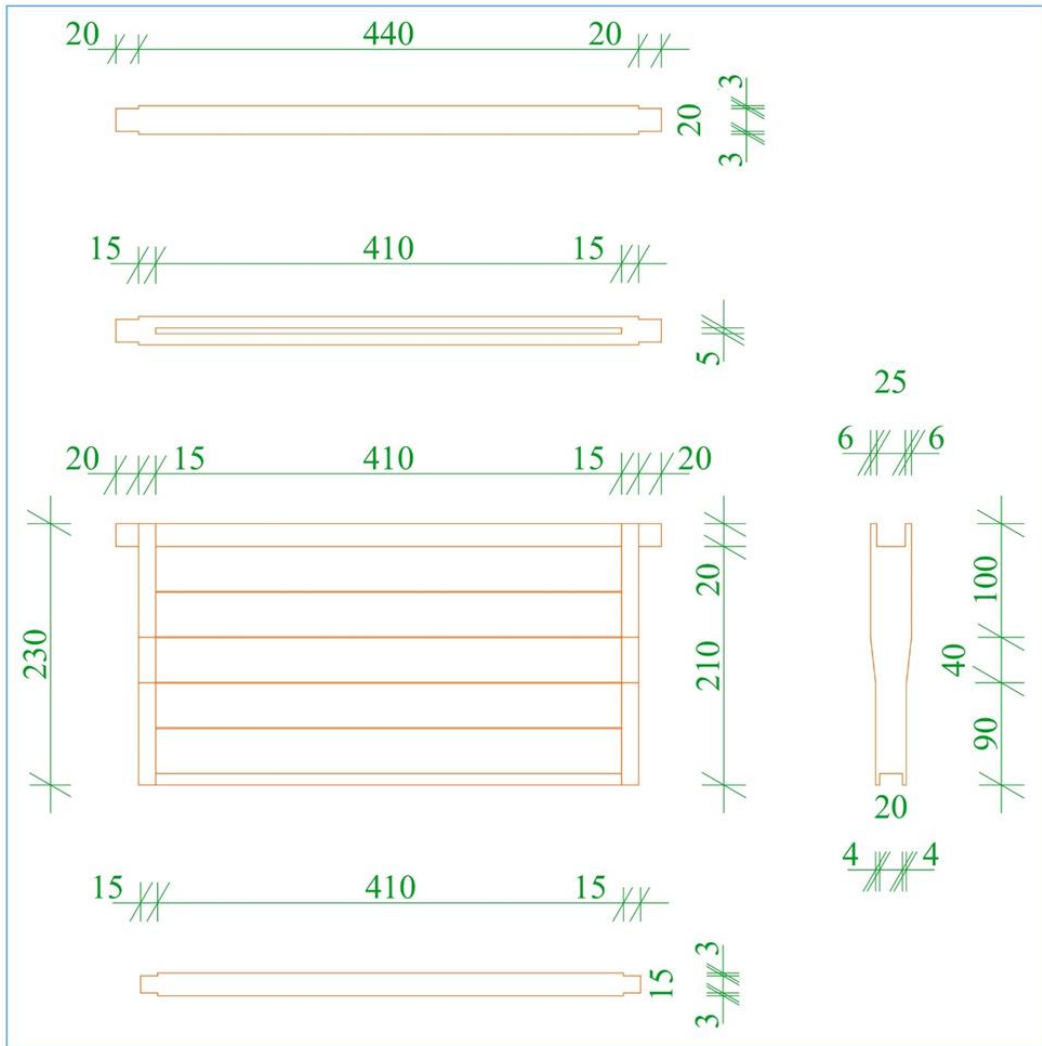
Detailed drawings of the frames used in the RBH
